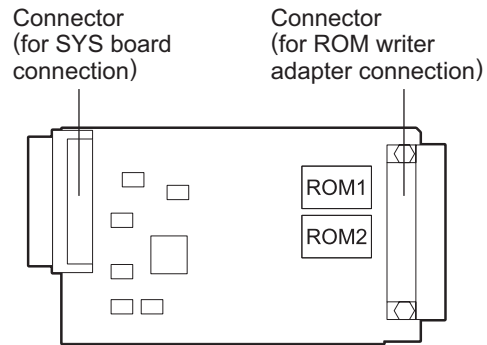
Jig board: PWA-DWNLD-350-JIG1(16 MB)
